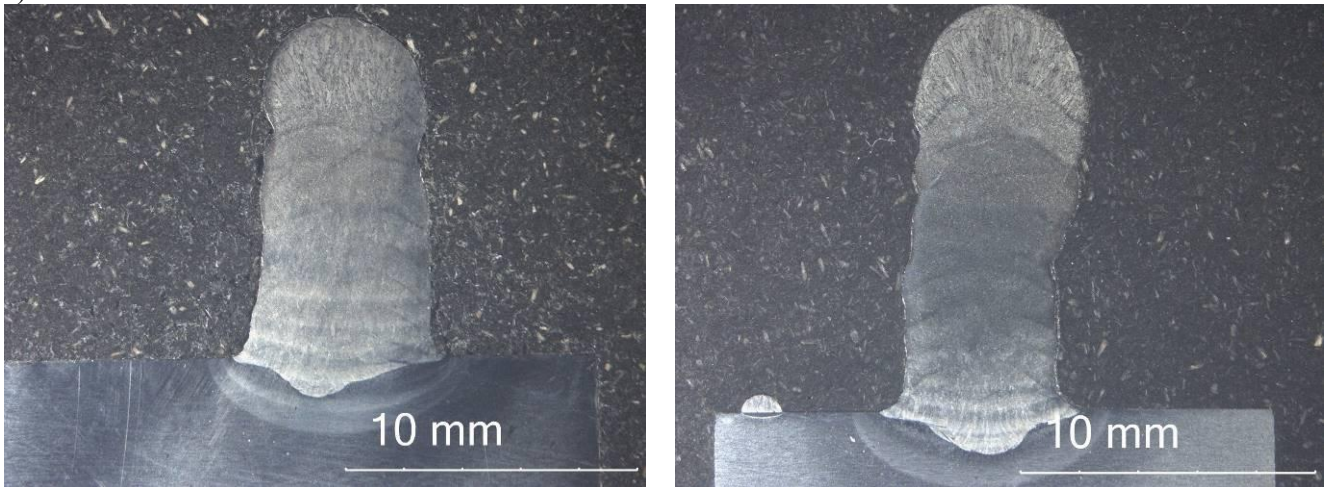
Macrostructure of multi-layer walls: a) Wall No. 1, height 12.2 mm; b) Wall No. 2
